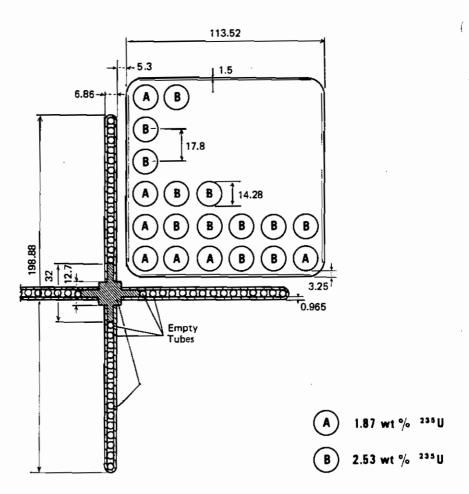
Cross section of the Gundremmingen assembly (All dimensions are given in mm)
